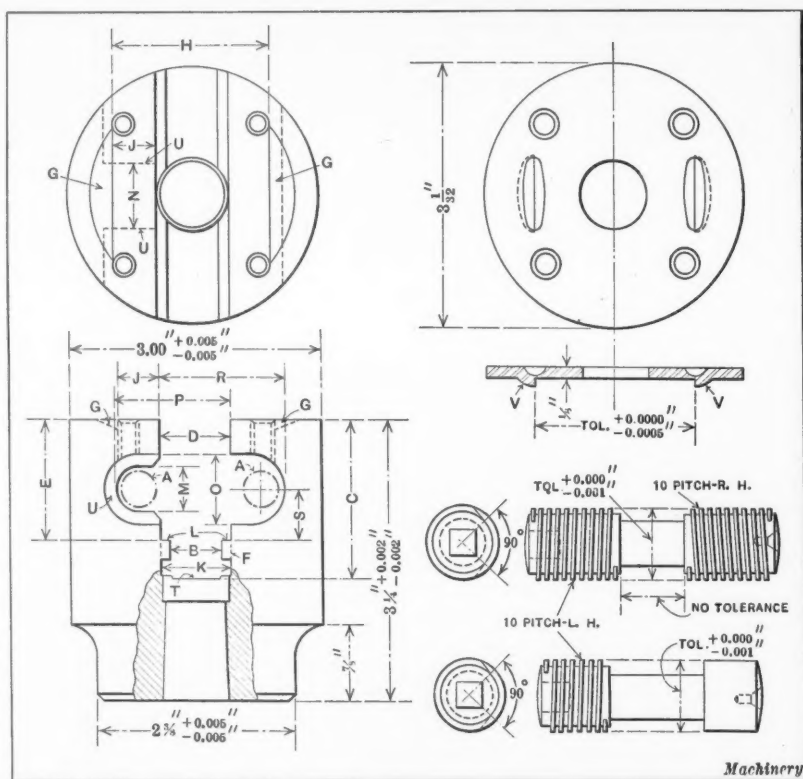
Casler Drill Chuck Body, Cap-plate, and Operating Screw
